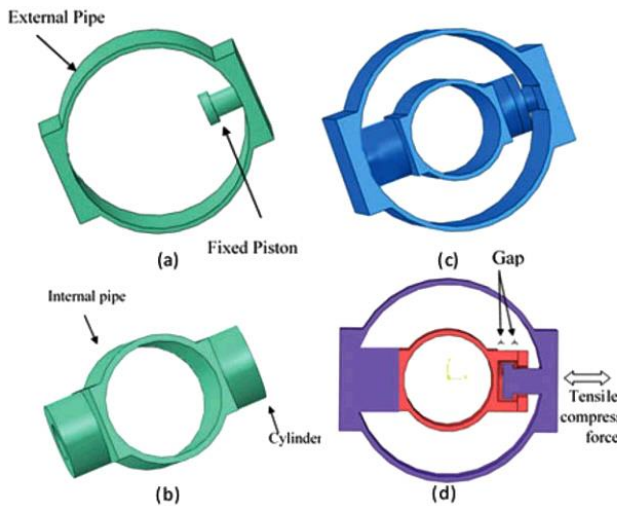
Multi-level pipe in pipe damper [4]: (a) Exterior pipe; (b) Interior pipe; (c) Assembled damper; (d) Damper's cross section
